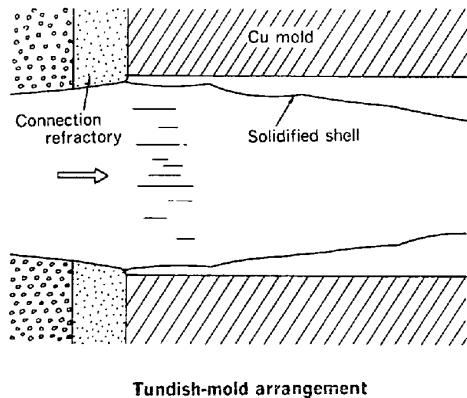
Section of tundish-mould arrangement¹⁷⁾.
